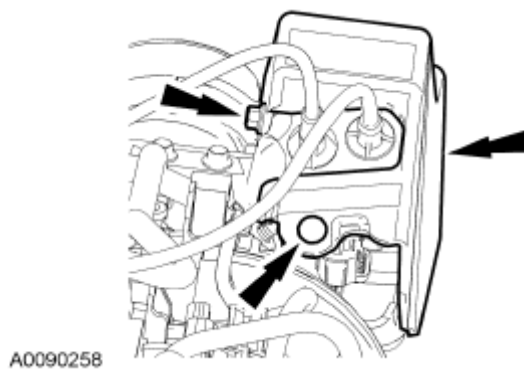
Locating Accelerator Cable Snow Shield & Retainers
